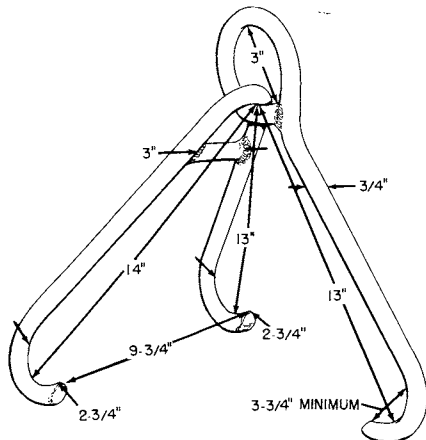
Diesel Engine Lifting Bracket - Hook Type
